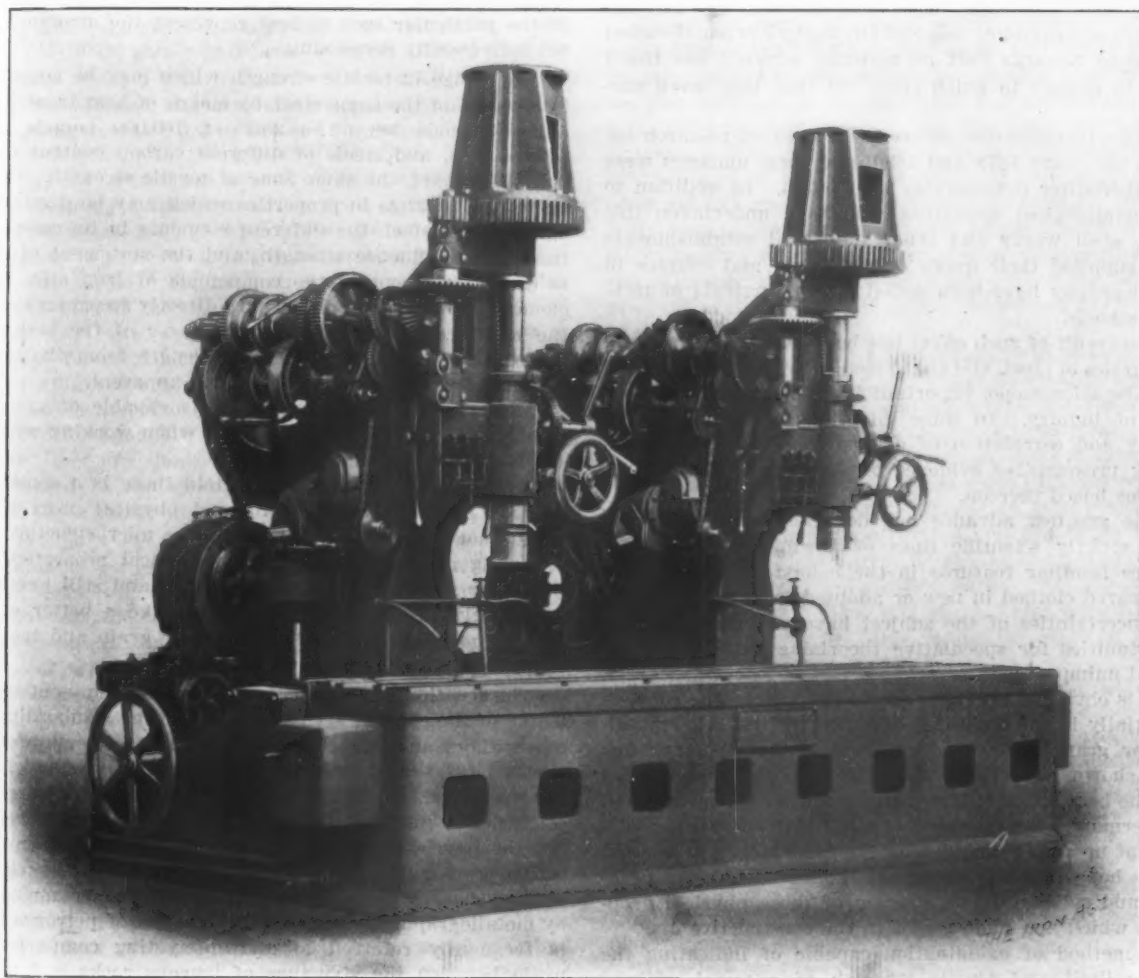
Baker Chain Driven Double Spindle Boring Machine
